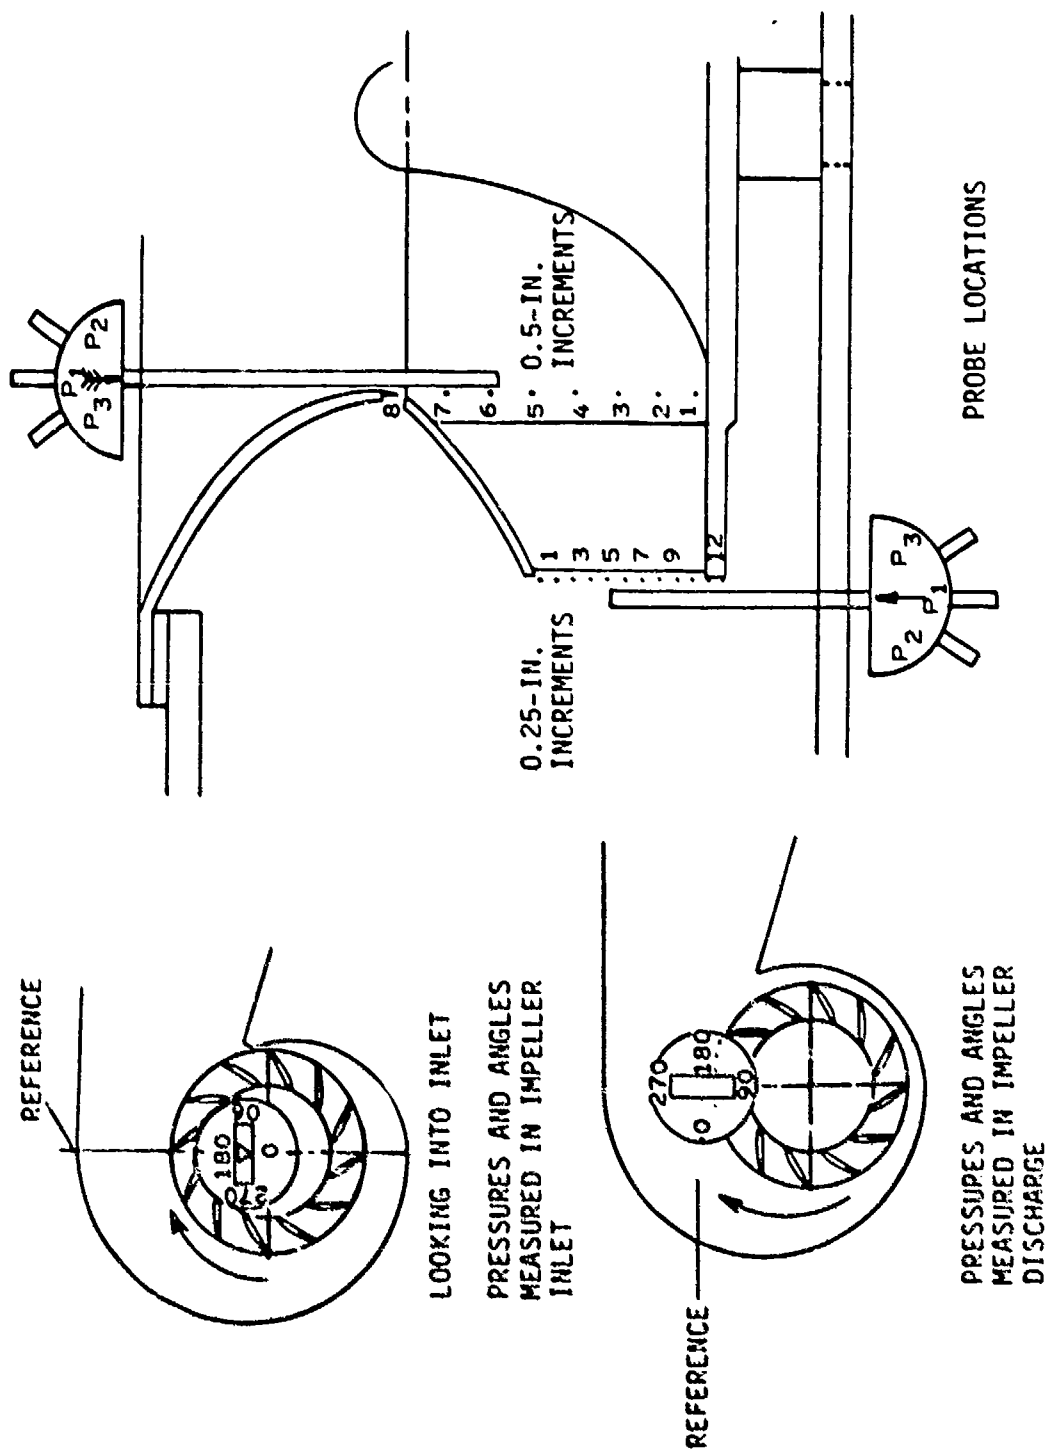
IMPELLER BLADE INLET AND DISCHARGE SURVEY LOCATIONS
